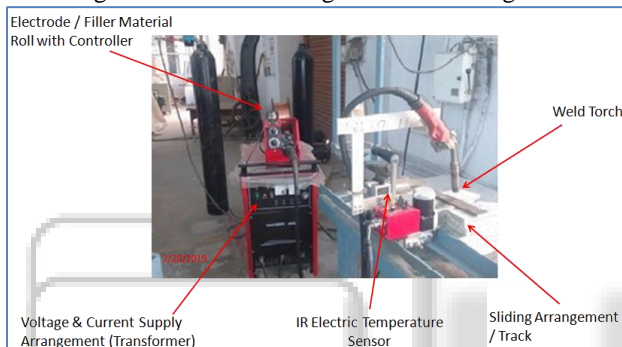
MIG Welding Arrangement at Laboratory
